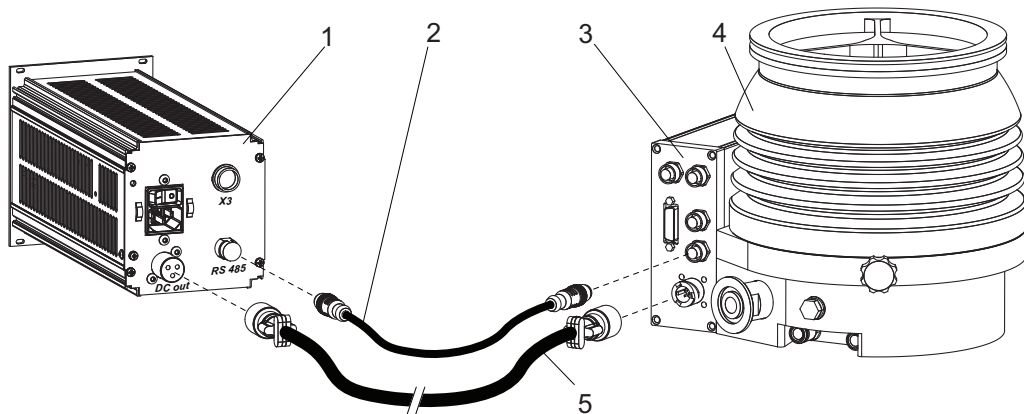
Example: Connection of a DCU with integrated power supply pack to a vacuum pump
